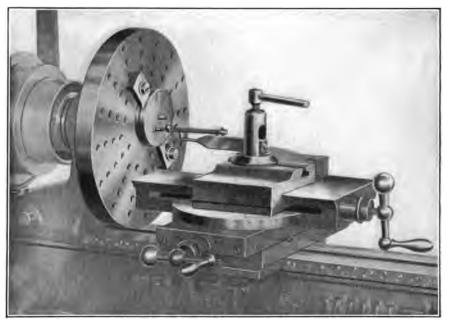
INDICATING A BUTTON ON THE MASTER PLATE
